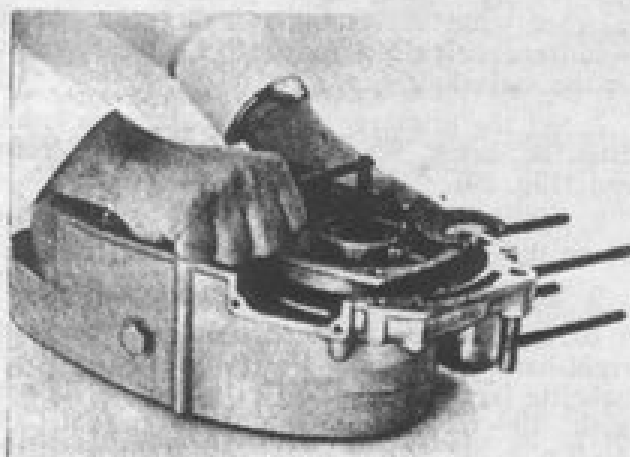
Pressing-off HJK-10-3 motorcycle crank chamber cover (11-nd method).
